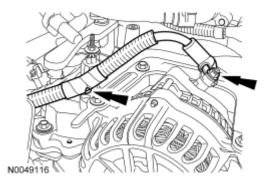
Generator Battery Cable & Retainer Courtesy of FORD MOTOR CO.
